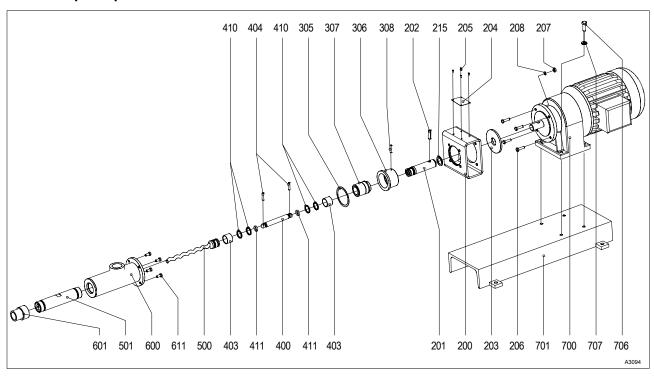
Spare parts for AFJ 06 / 08 / 10
